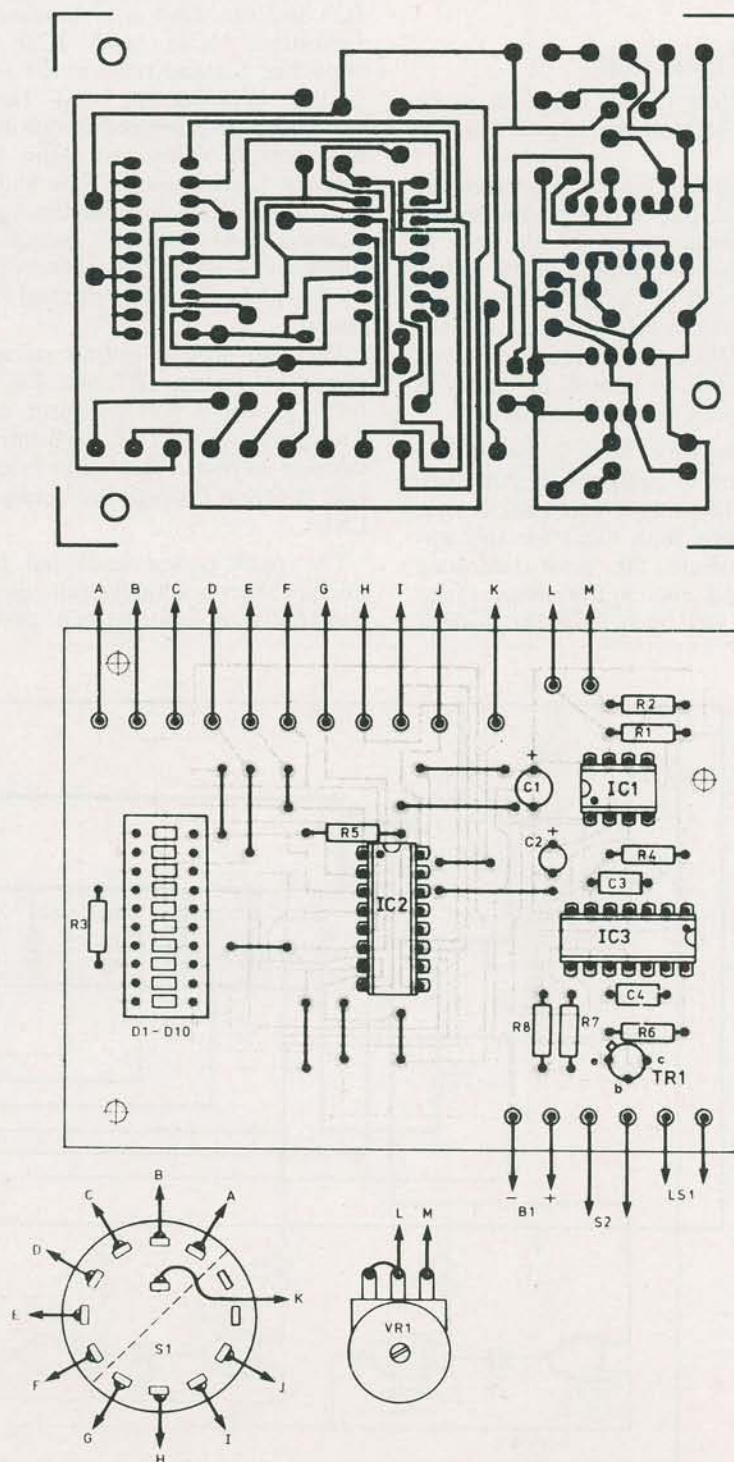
Full size printed circuit board master foil pattern (top), component layout and interwiring for the metronome. Note that a 20-pin DIL socket must be used for mounting the bargraph display.
